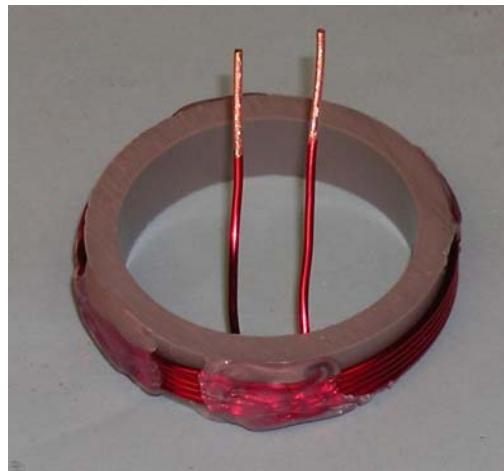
Winding Inductor Coil – Cut Wires to Length and Strip Ends
